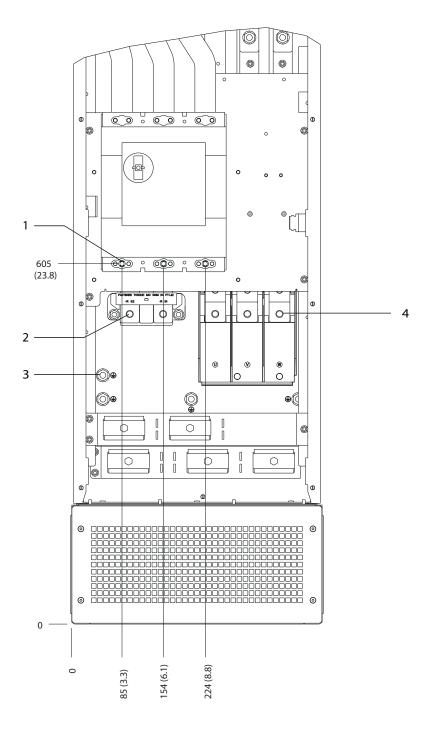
D8h Terminal Dimensions with Contactor and Disconnect Options (Front View)
